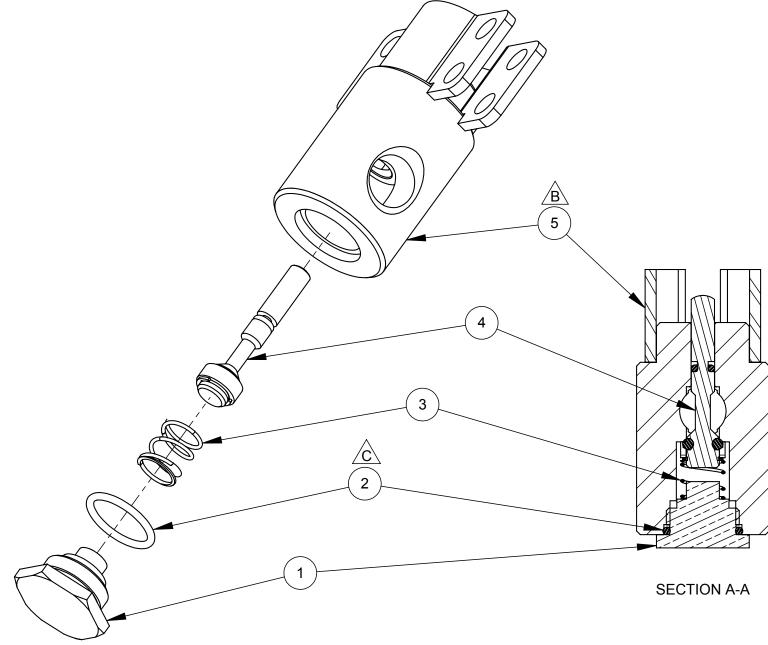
Solution Valve Assembly 000-169-058 Rev. C
